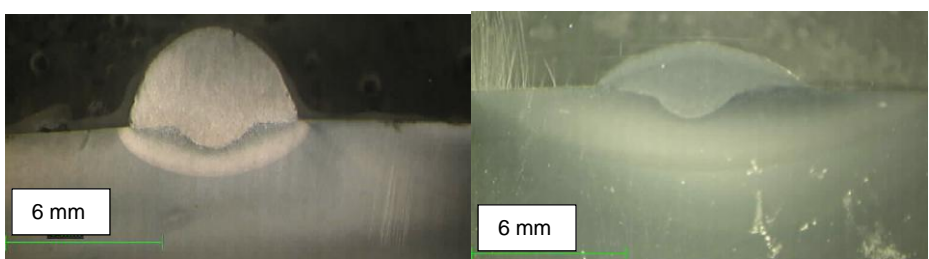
Macrographs of CMT weld (left) and laser CMT assisted weld (right) of 6 kW laser power, 20 mm process distance, 20 mm beam diameter and 5 m/min CMT WFS
